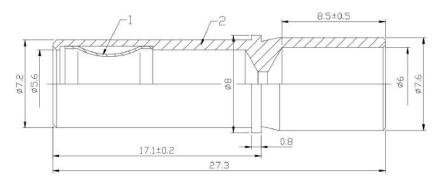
Wiring Harness Power Terminal dimension (mm)
